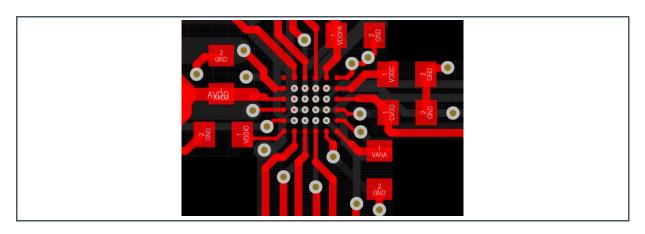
PCB Layout Bottom Layer – Components On Single Side, Not All Pins Are Routed
